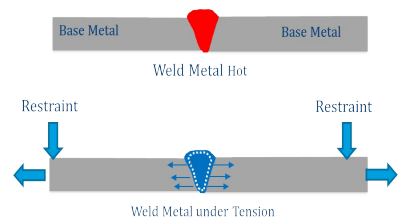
Tensile residual stress during cooling of weld metal
